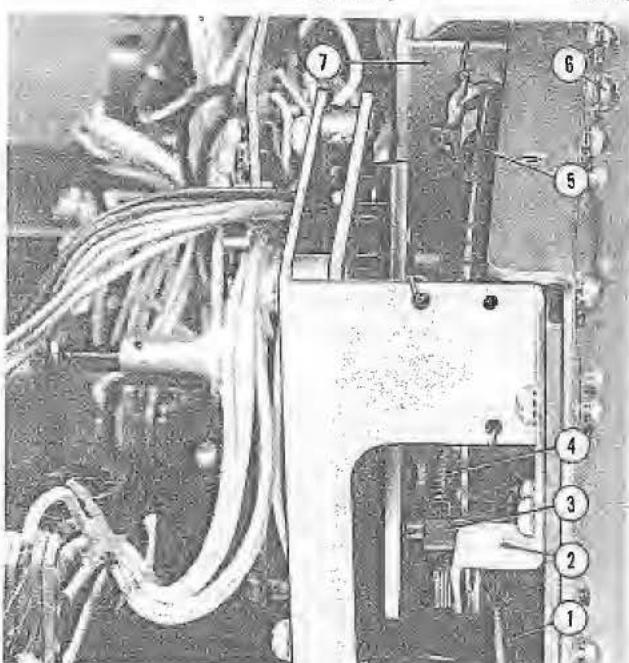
CANCEL SOLENOID ADJUSTMENT
